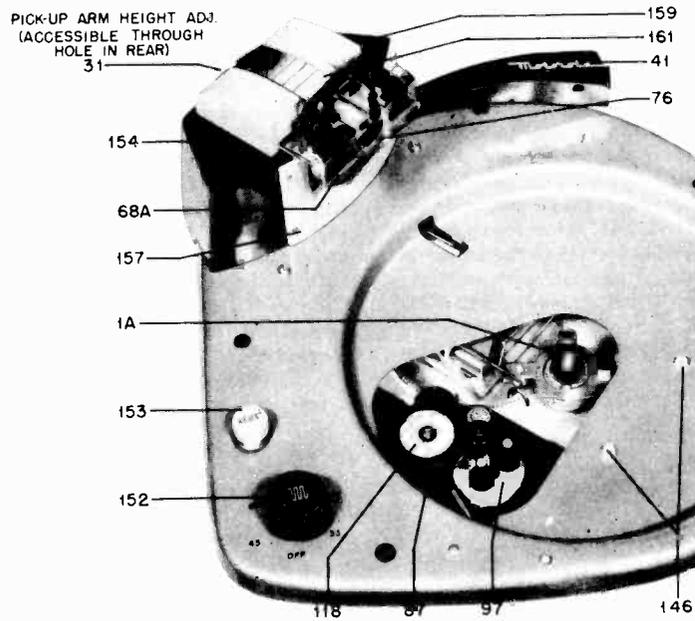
TOP VIEW OF RECORD CHANGER WITH TURNTABLE REMOVED
